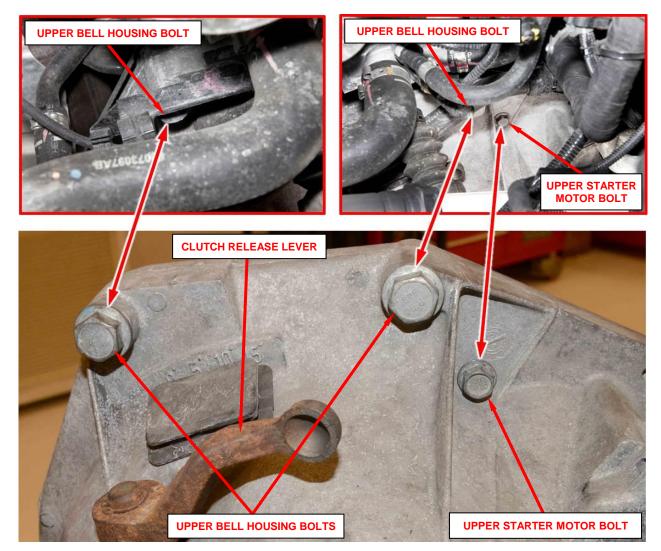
Upper Bell Housing Bolts And Upper Starter Bolt
